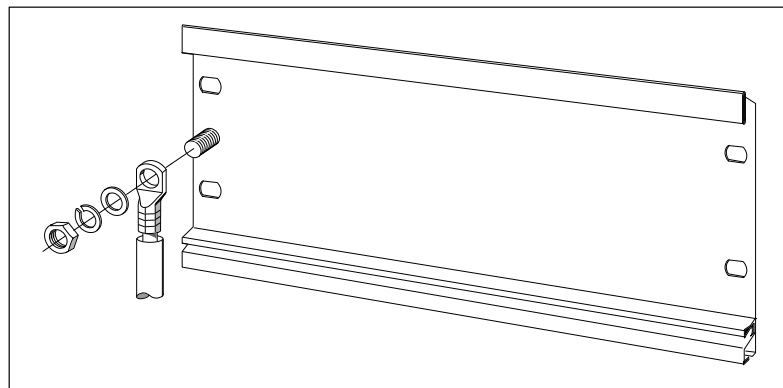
Connecting the Protective Grounding Conductor to the Rail
